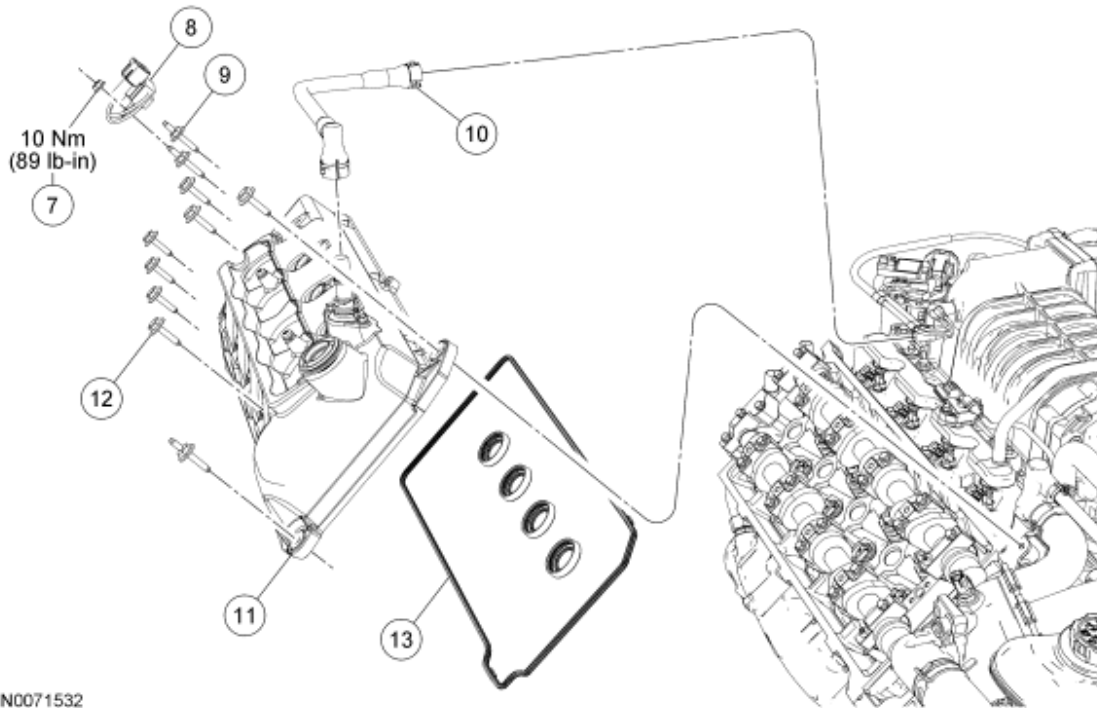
Exploded View Of RH Valve Cover With Torque Specification (1 Of 2)
